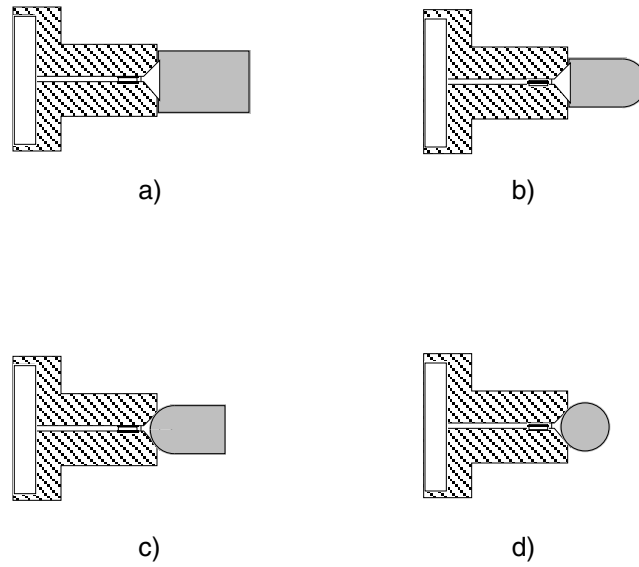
Four-step process for machining foam spheres. A cylindrical foam blank is held on the front of the vacuum adapter for machining of the o.d. in (a). In (b) a hemisphere is machined on one end. In (c) the blank has been reversed in the adapter and the final hemisphere is machined in (d).
